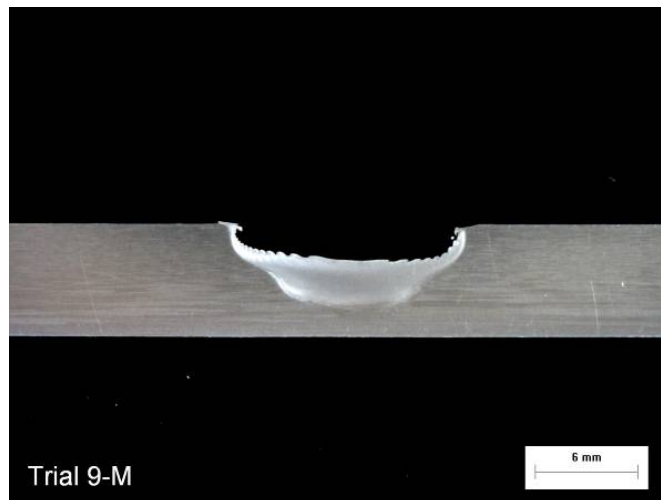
Macrograph of MA956 Circumferential Weld
